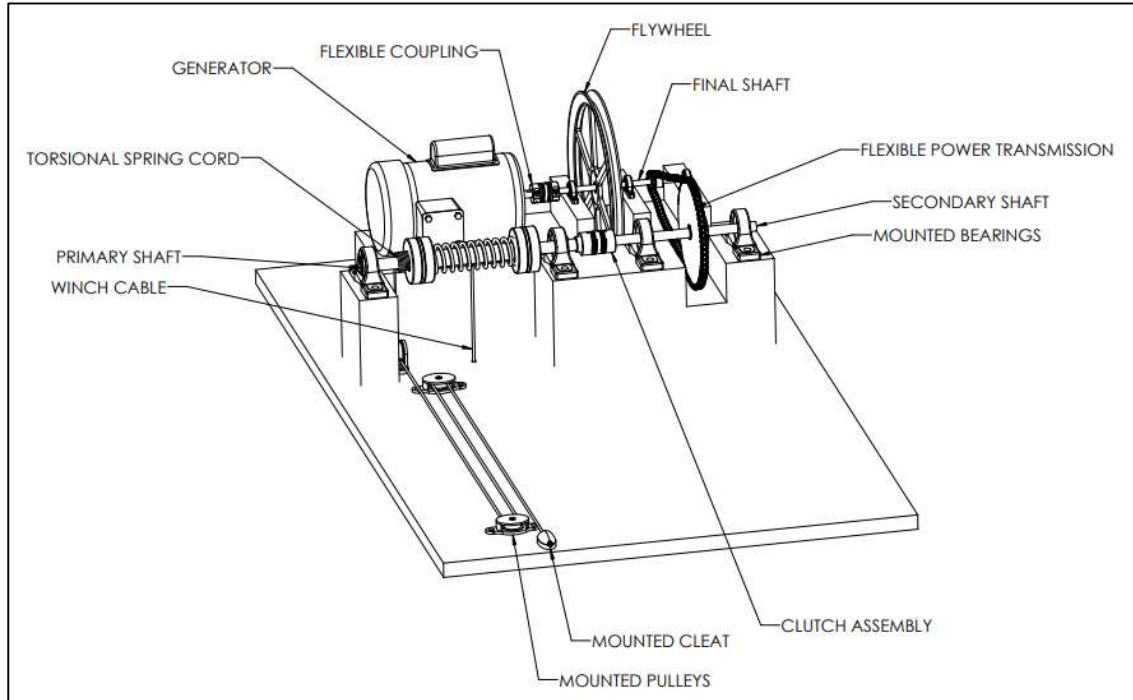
Isometric view of the mechanical drivetrain system design model from SolidWorks™
